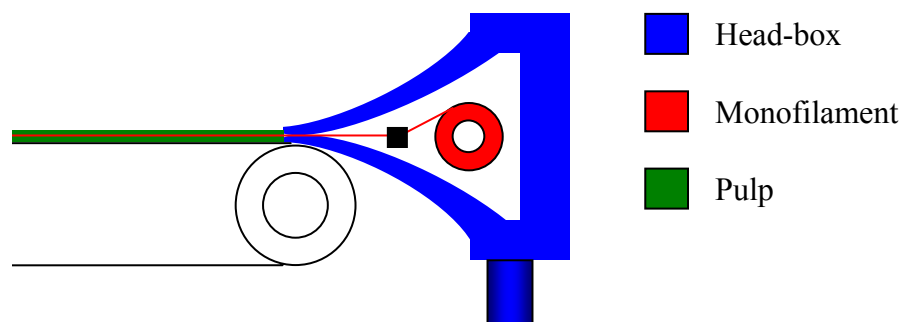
A Fourdrinier Machine with a Split Head-box.
